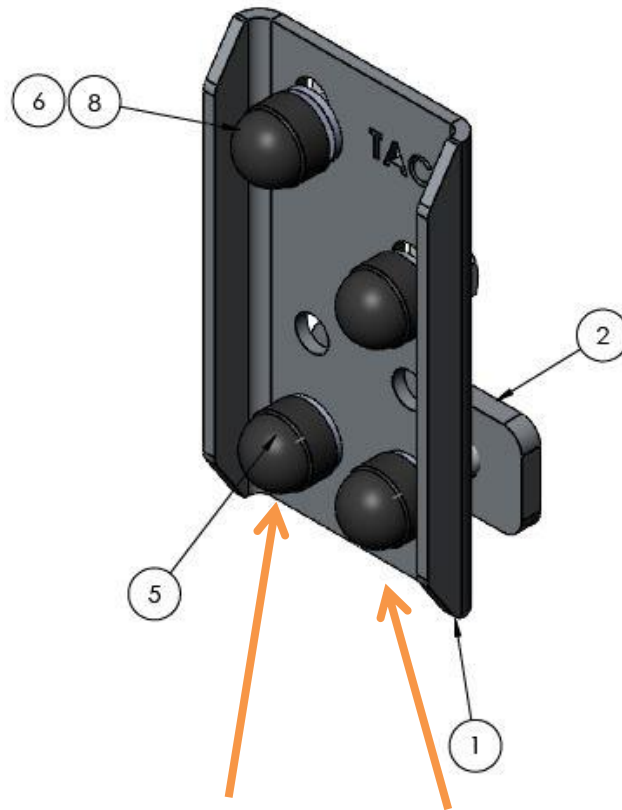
Button Head Bolts with Flat Washers and Spring Washers
